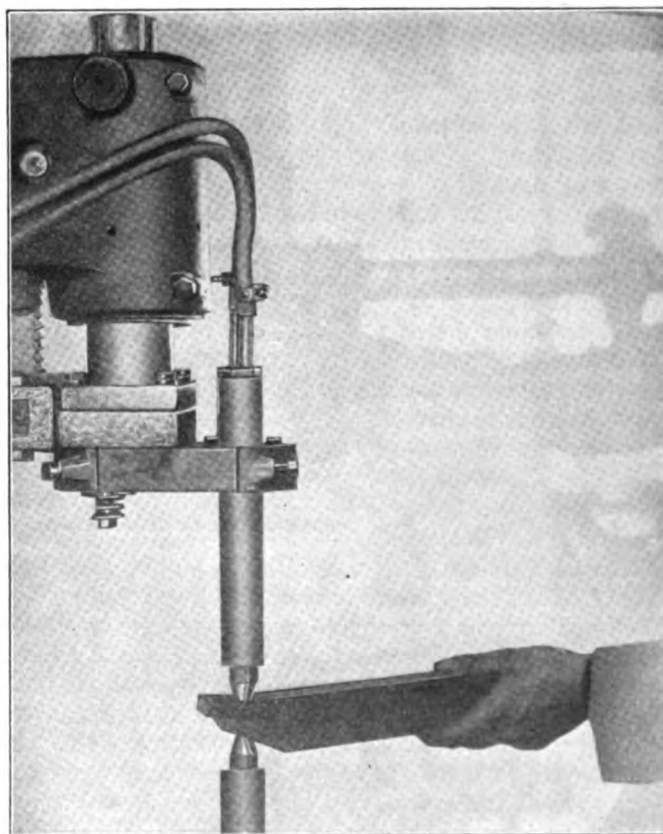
SPOT-WELDING A LARGE TOOL
